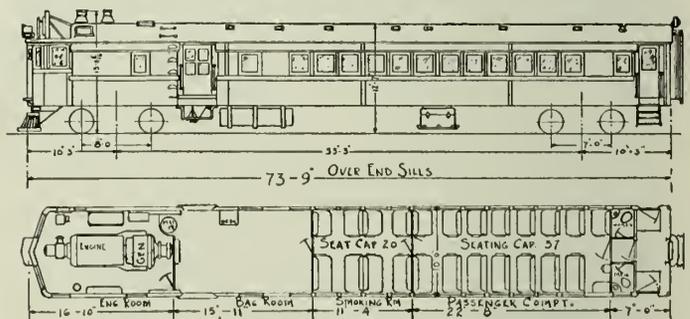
Plan and Elevation of 300 h.p. Six-Cylinder Car.
